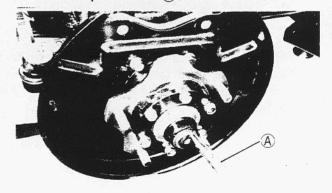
(A) Circlip Remover (09900-06107)
